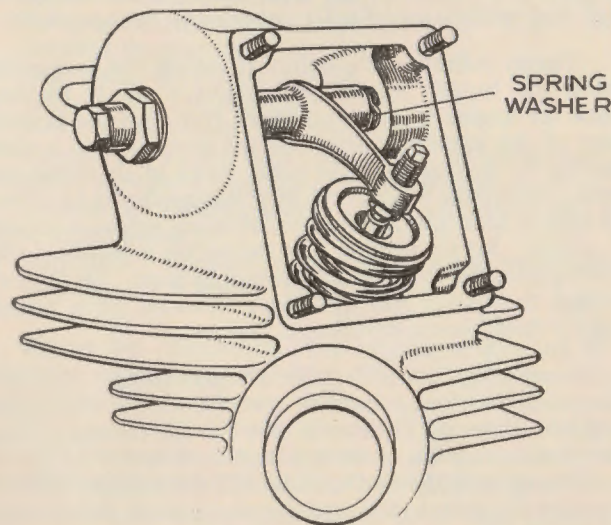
The tappet adjuster is screwed into the rocker and retained by a locknut beneath the rocker. Note the position of the spring washer behind the rocker pivot.
